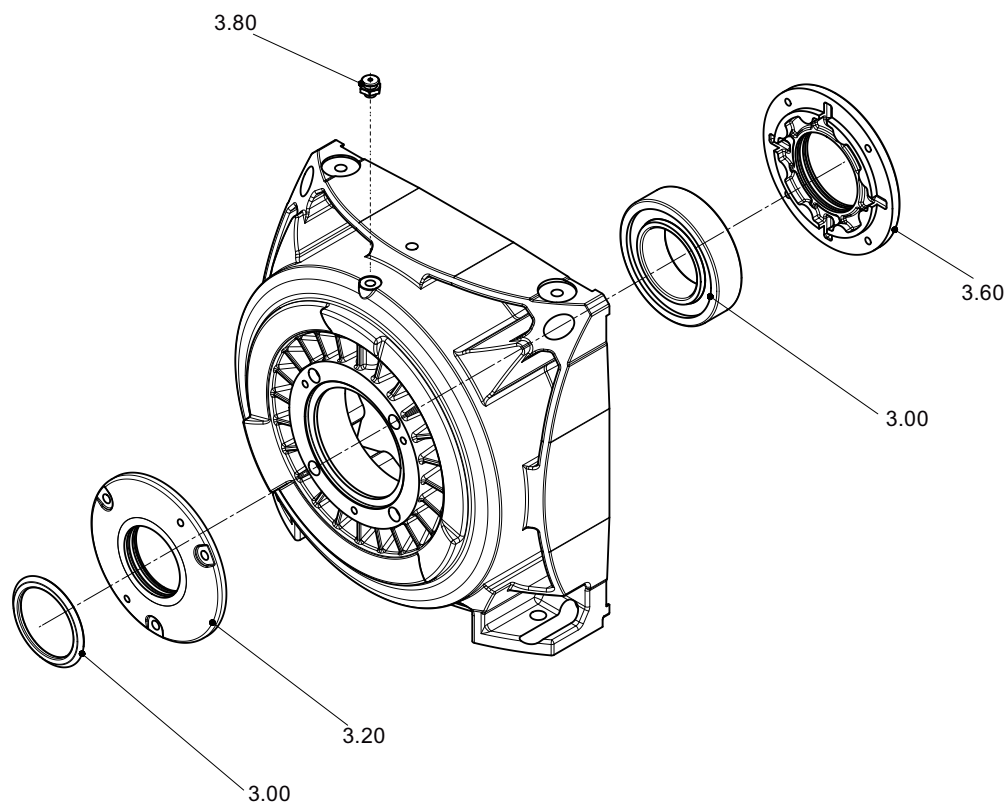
Rolling-contact bearing bush drive end with belt coupling, with regreasing
